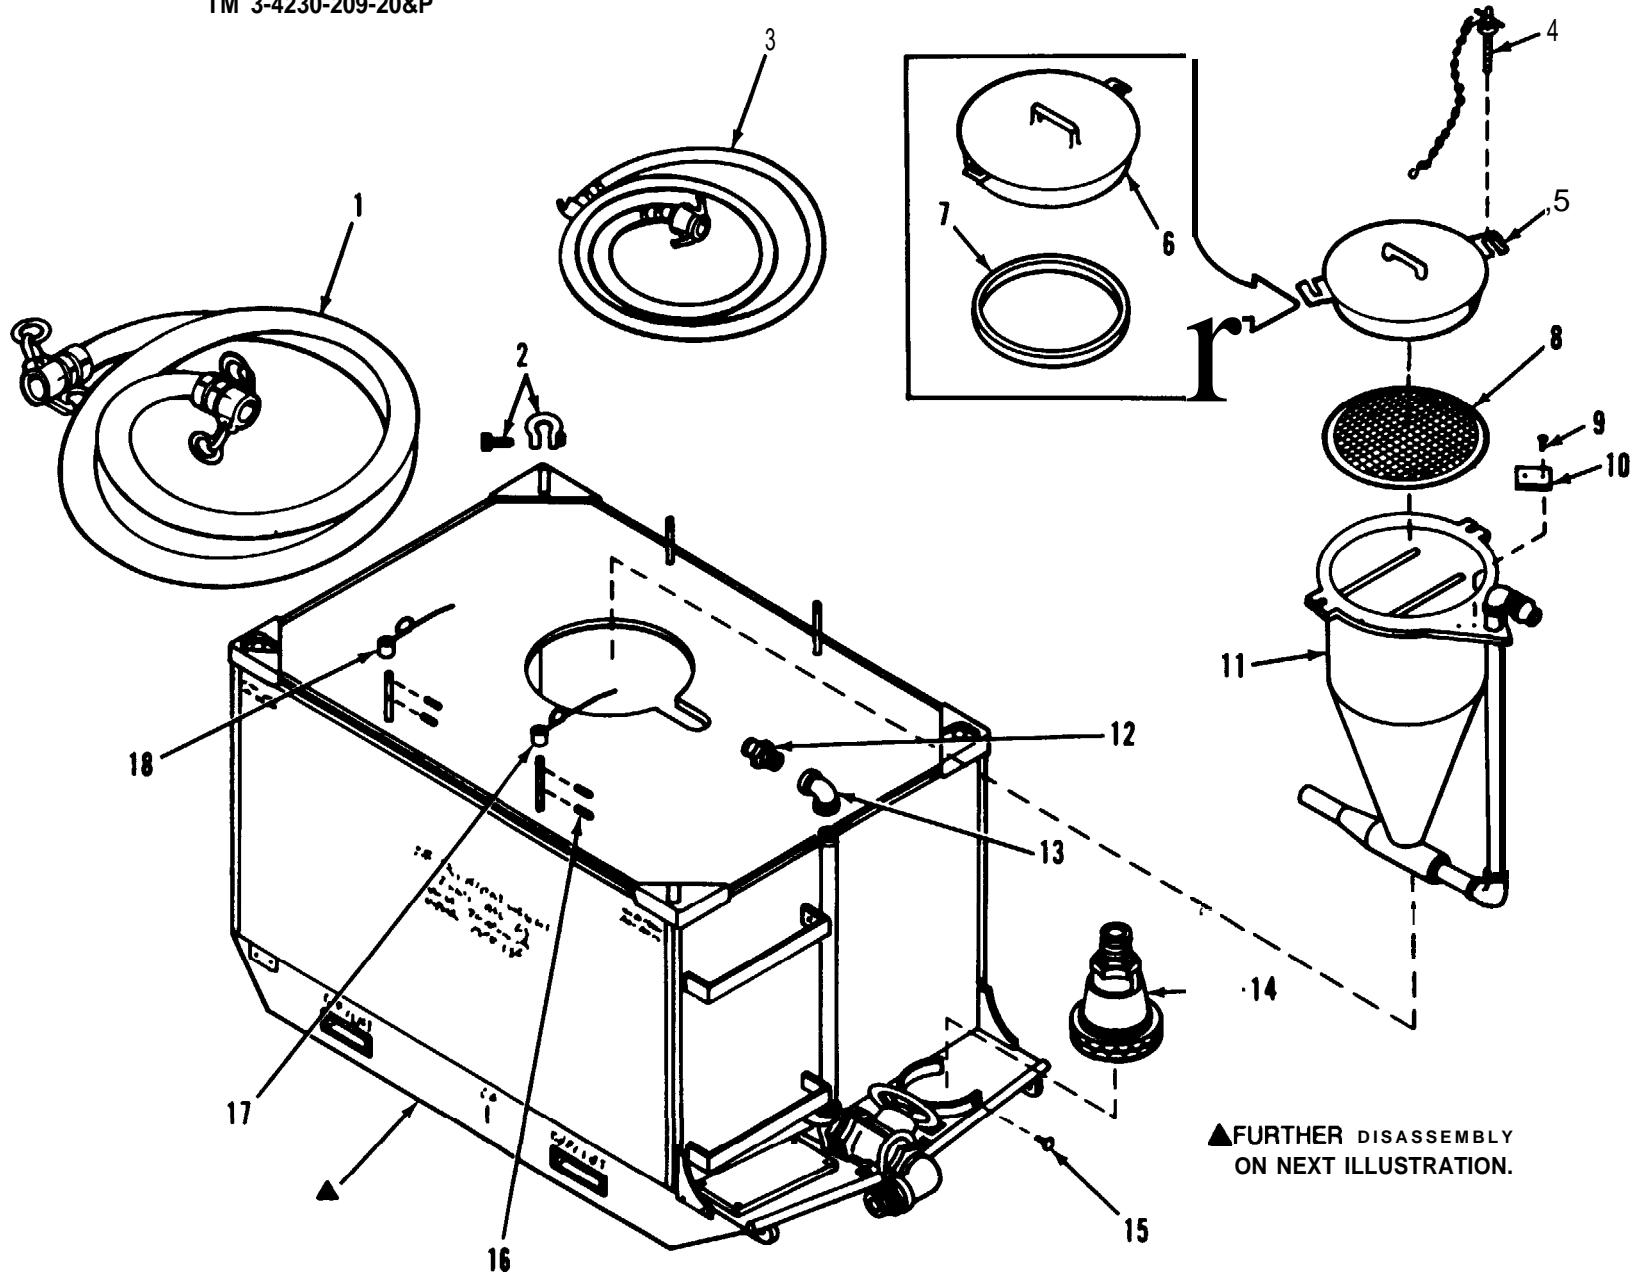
Skid Mounted Decontaminating Apparatus Tank Unit and Hopper Access Cover (1 of 2).
